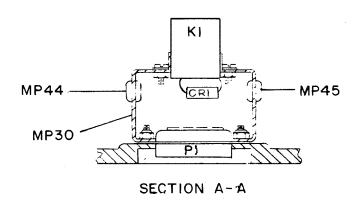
Mounting Base Assembly (P/O A2A4), Component Locations
